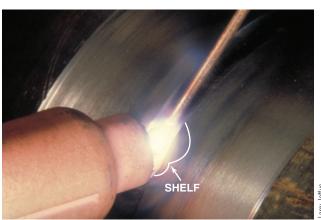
The shelf will support the molten pool during the vertical portion of the weld.
